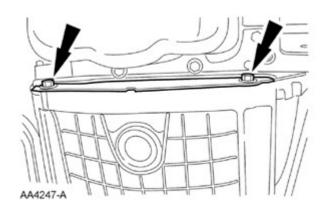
Locating Flexplate Inspection Cover Bolts Courtesy of FORD MOTOR CO.
